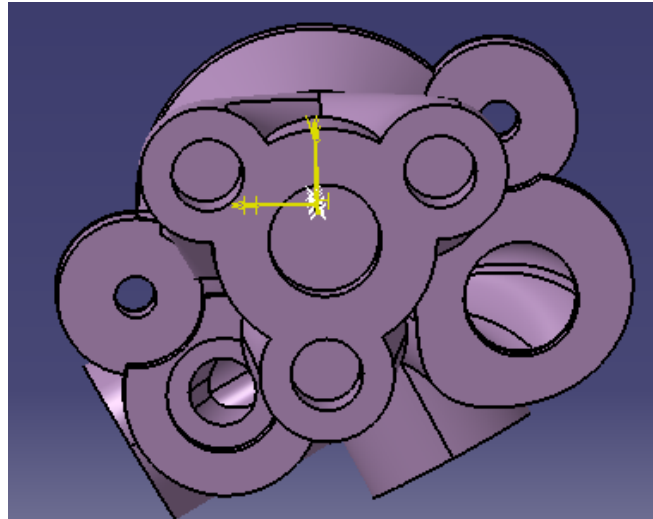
, CAD drawing of air drill back view (Grindley, 2014)
